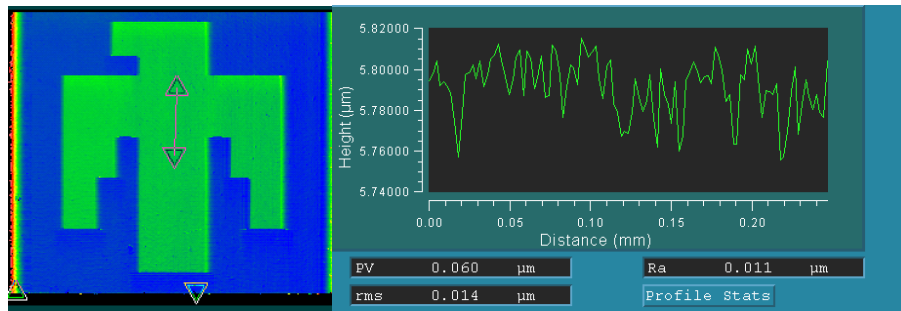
Thunderbird machined in 17-4PH stainless steel
